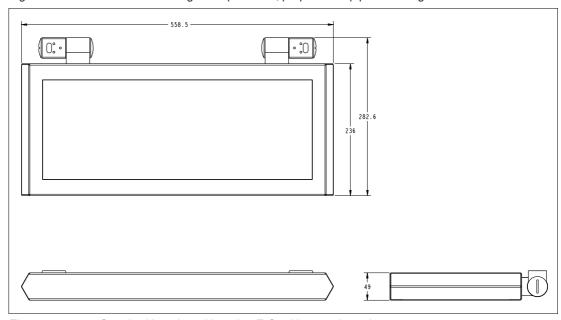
Standard housing with option F-C, with mounting adaptor
